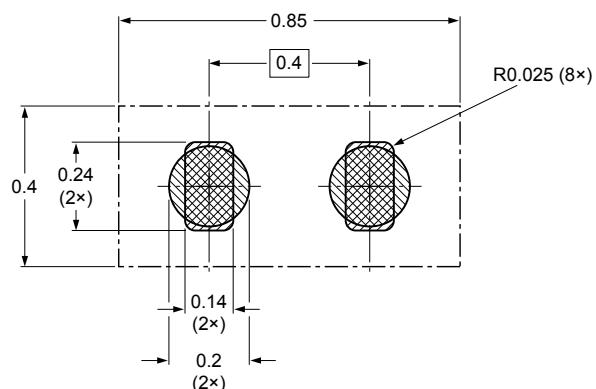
Package outline DSN0603-2 (SOD962-2)
